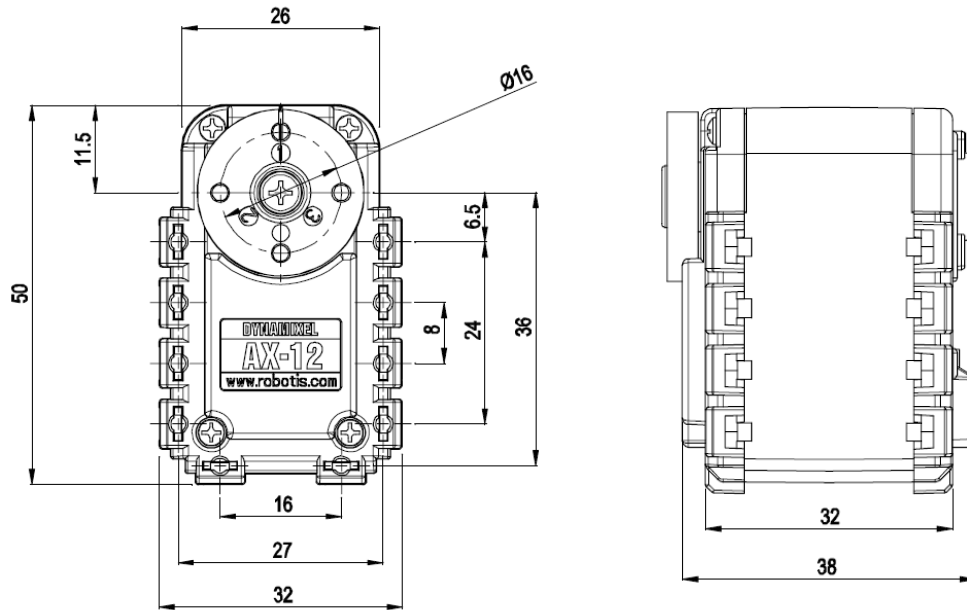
Servo AX-12 schematic dimensions (mm) [6]
